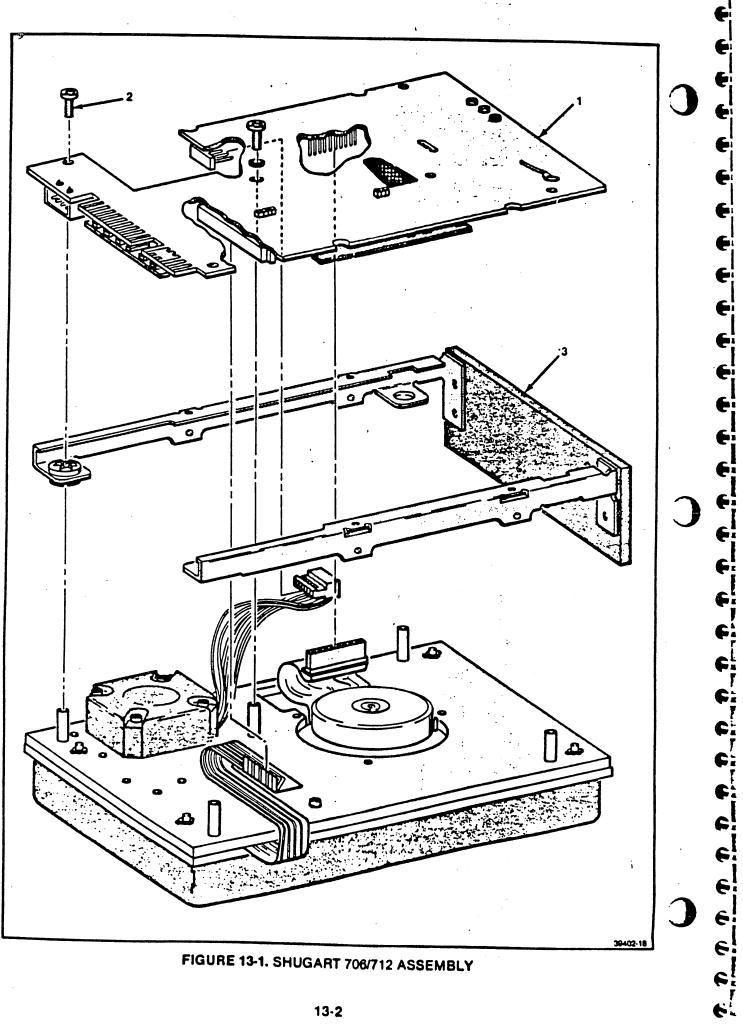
SHUGART 706/712 ASSEMBLY
